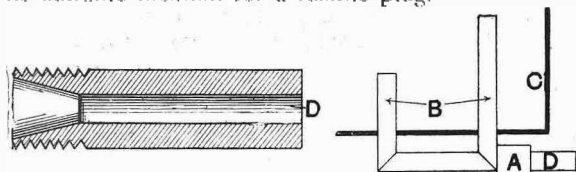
The Stanley fusible plug—A is a joint in the water-piping, into which the fusible plug D is screwed. B indicates two tubes open to water and steam within the boiler shell C, while D is the fusible plug—an enlarged drawing of which is seen on the left.
